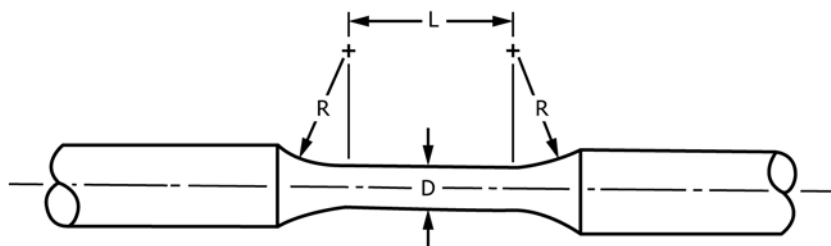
Specimens with Tangentially Blending Fillets Between the Test Section and the Ends
